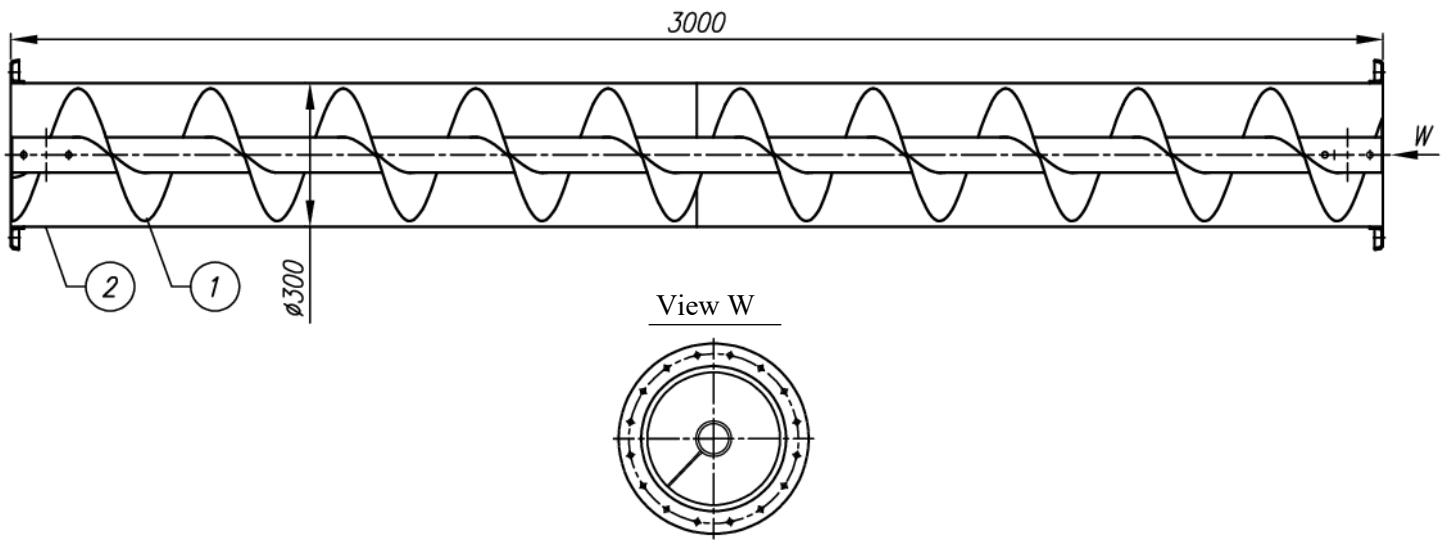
A 3.0 m long extension of the screw conveyor PS300 (PS300-P3.0)
